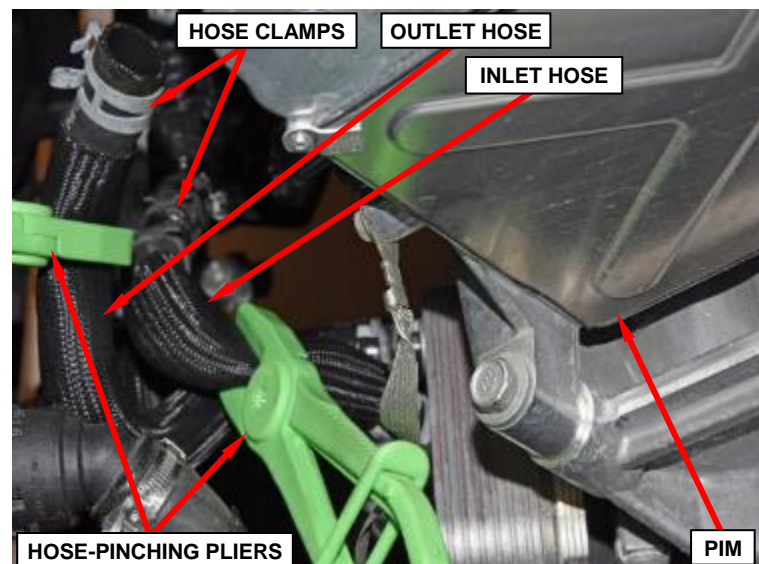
PIM Coolant Inlet And Outlet Hoses
